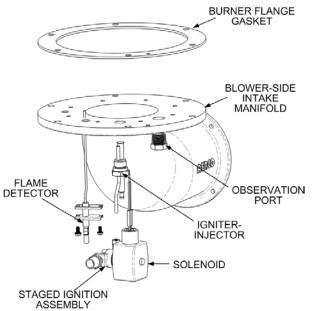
Blower-Side intake Manifold (With Igniter-Injector Part No. 58023)
